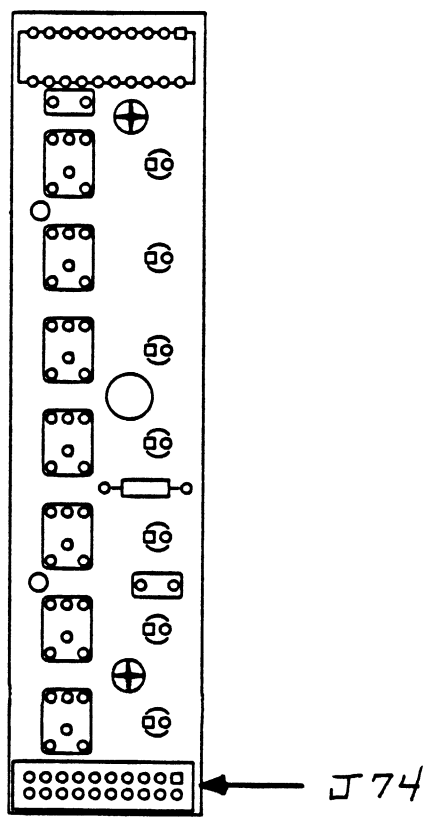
Connector location for the removal of the A5A8 Center Front Panel Board.
